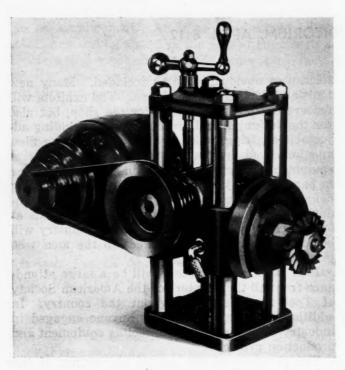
Self-contained Master "Lathe Converter" Ready to be Mounted on the Cross-slide of a Lathe Carriage
